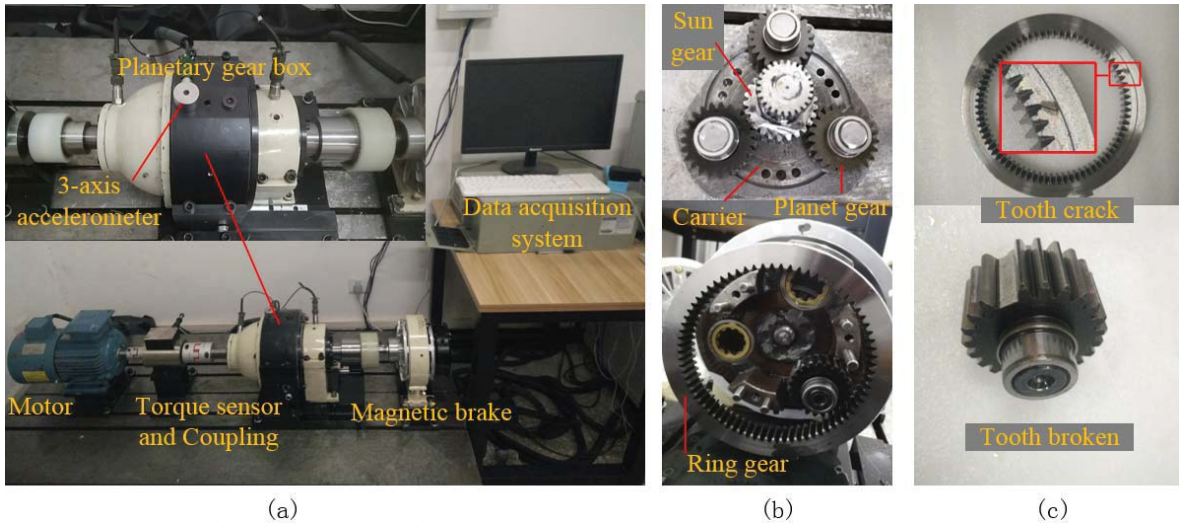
Test rig of planetary gearbox: (a) planetary gearbox test rig, (b) the inner structure of planetary gear box, (c) the ring gear and planet gear with tooth crack and tooth broken respectively
